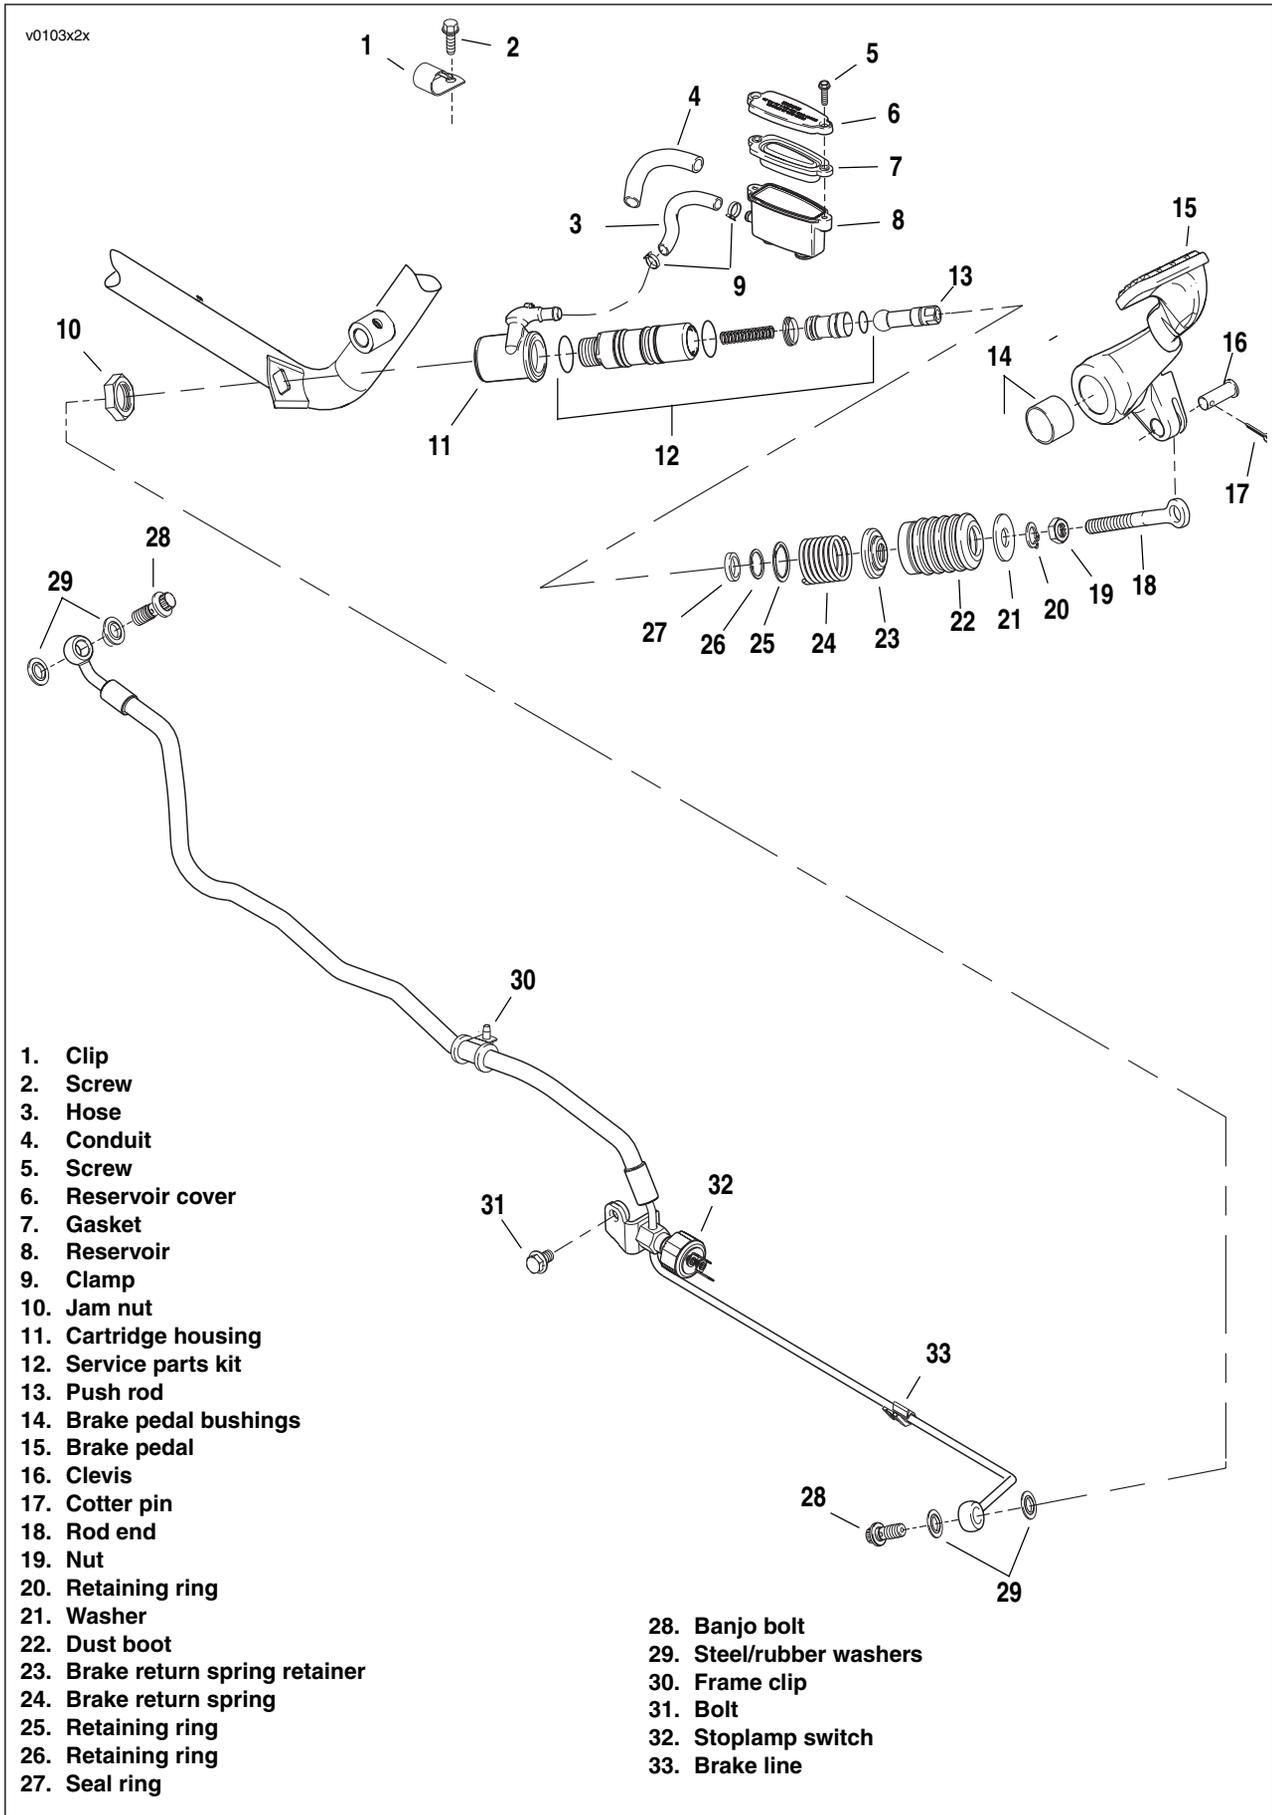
Rear Brake Master Cylinder/Reservoir
